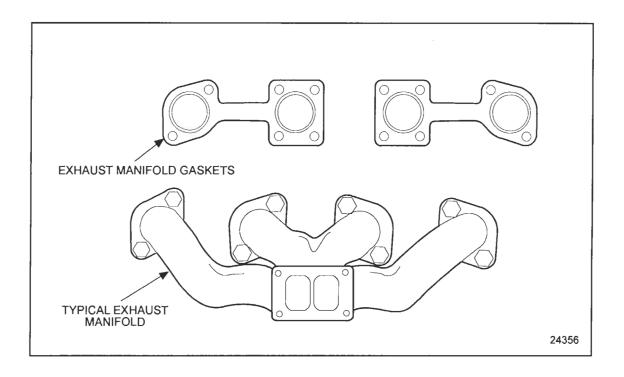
Exhaust Manifold Gaskets and Related Parts
